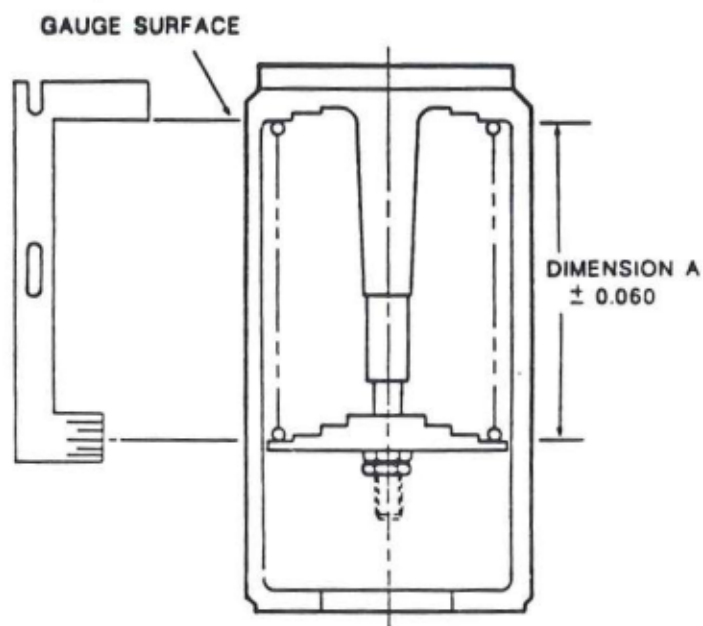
Location of Spring Height Gage for Pull Type Hydramotors
